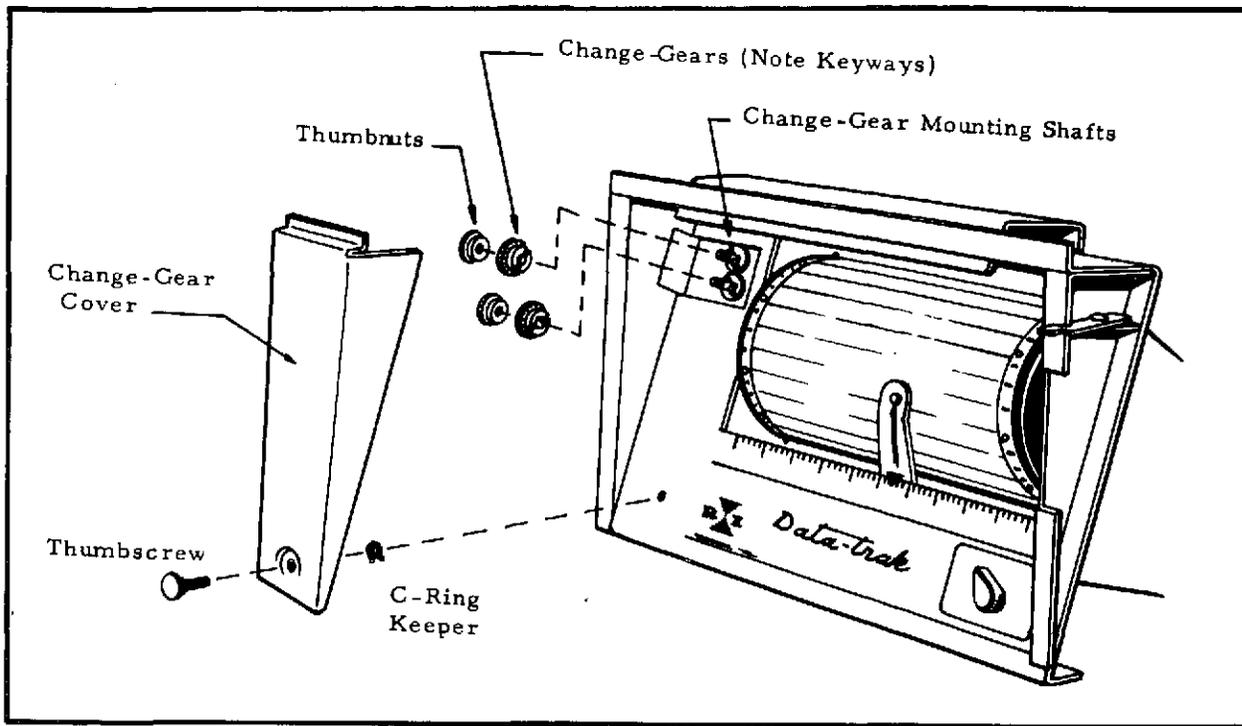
CHANGE-GEAR ACCESS and MOUNTING POSITIONS
